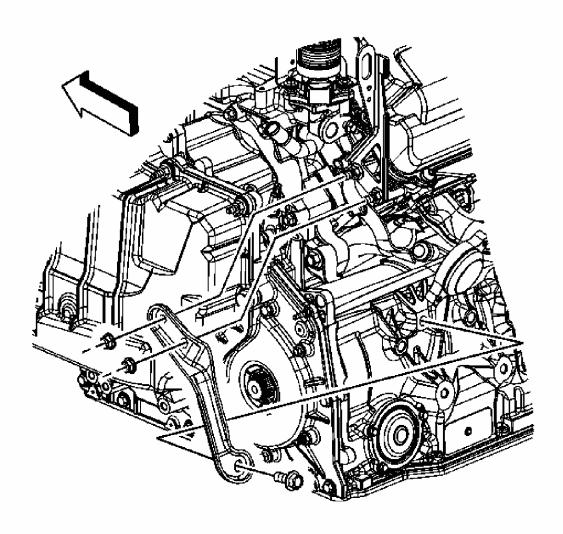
Identifying Engine Lift Bracket Courtesy of GENERAL MOTORS CORP.
